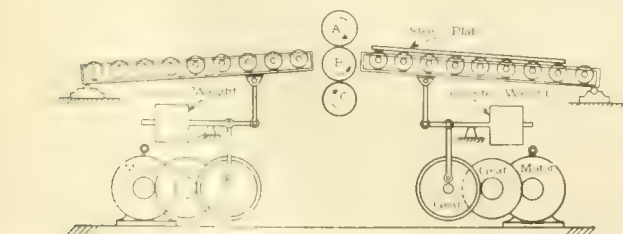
TYPICAL APPLICATION OF MOTORS AND GEARS TO TILTING ROLL TABLE OF BLOOMING MILL
